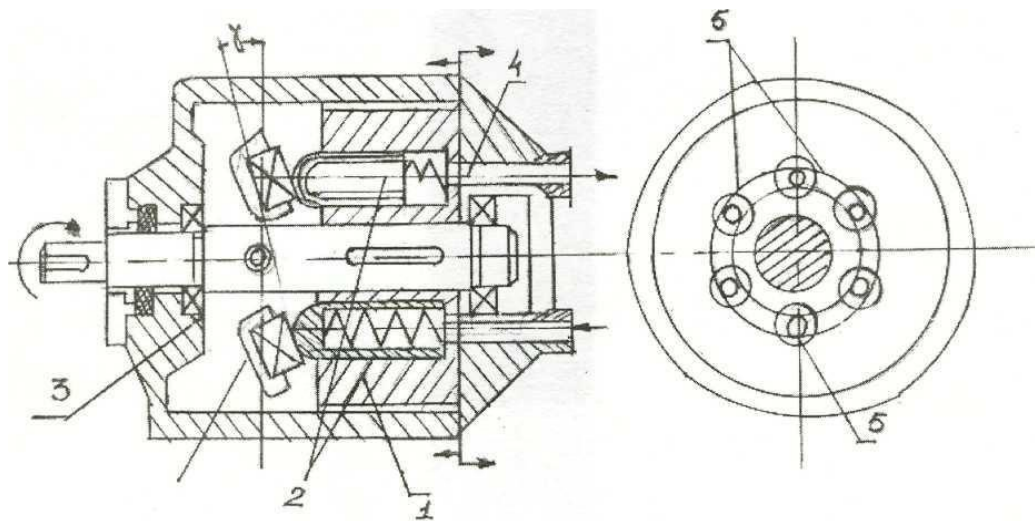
Principle diagram of axial piston hydraulic machine.
